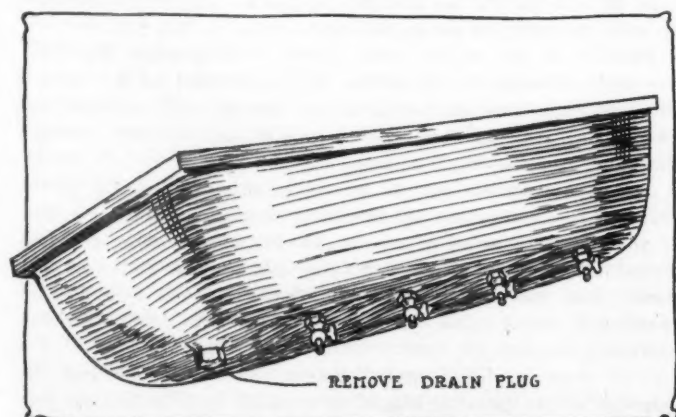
Petcocks on the bottom of the crankcase should be opened and the drain plug removed to clean out the old oil
